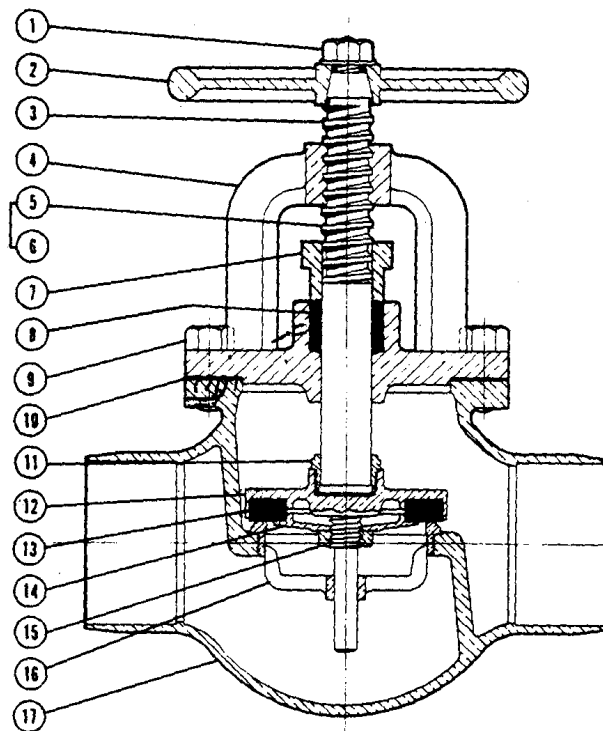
Globe-type valve with flat-face bolted bonnet.
